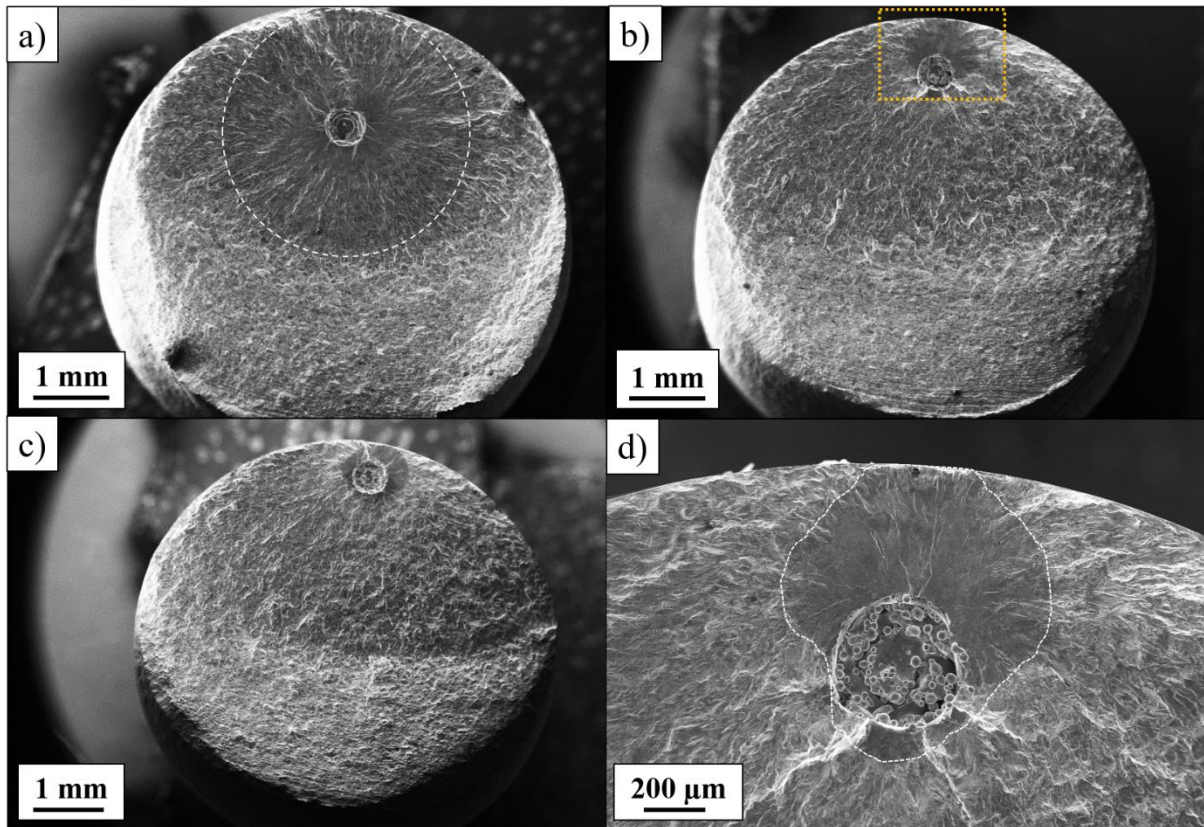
Fracture surfaces of samples a) M430-3, b) D430-3 and c) R430-3. d) close-up picture on the deterministic pore in sample D430-3.
